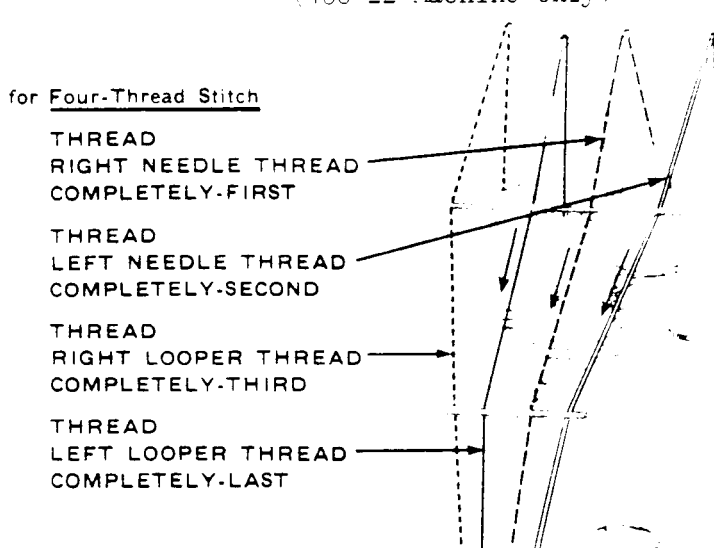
Unwinder 81444 Threaded for Four-Thread Dual Stitch
